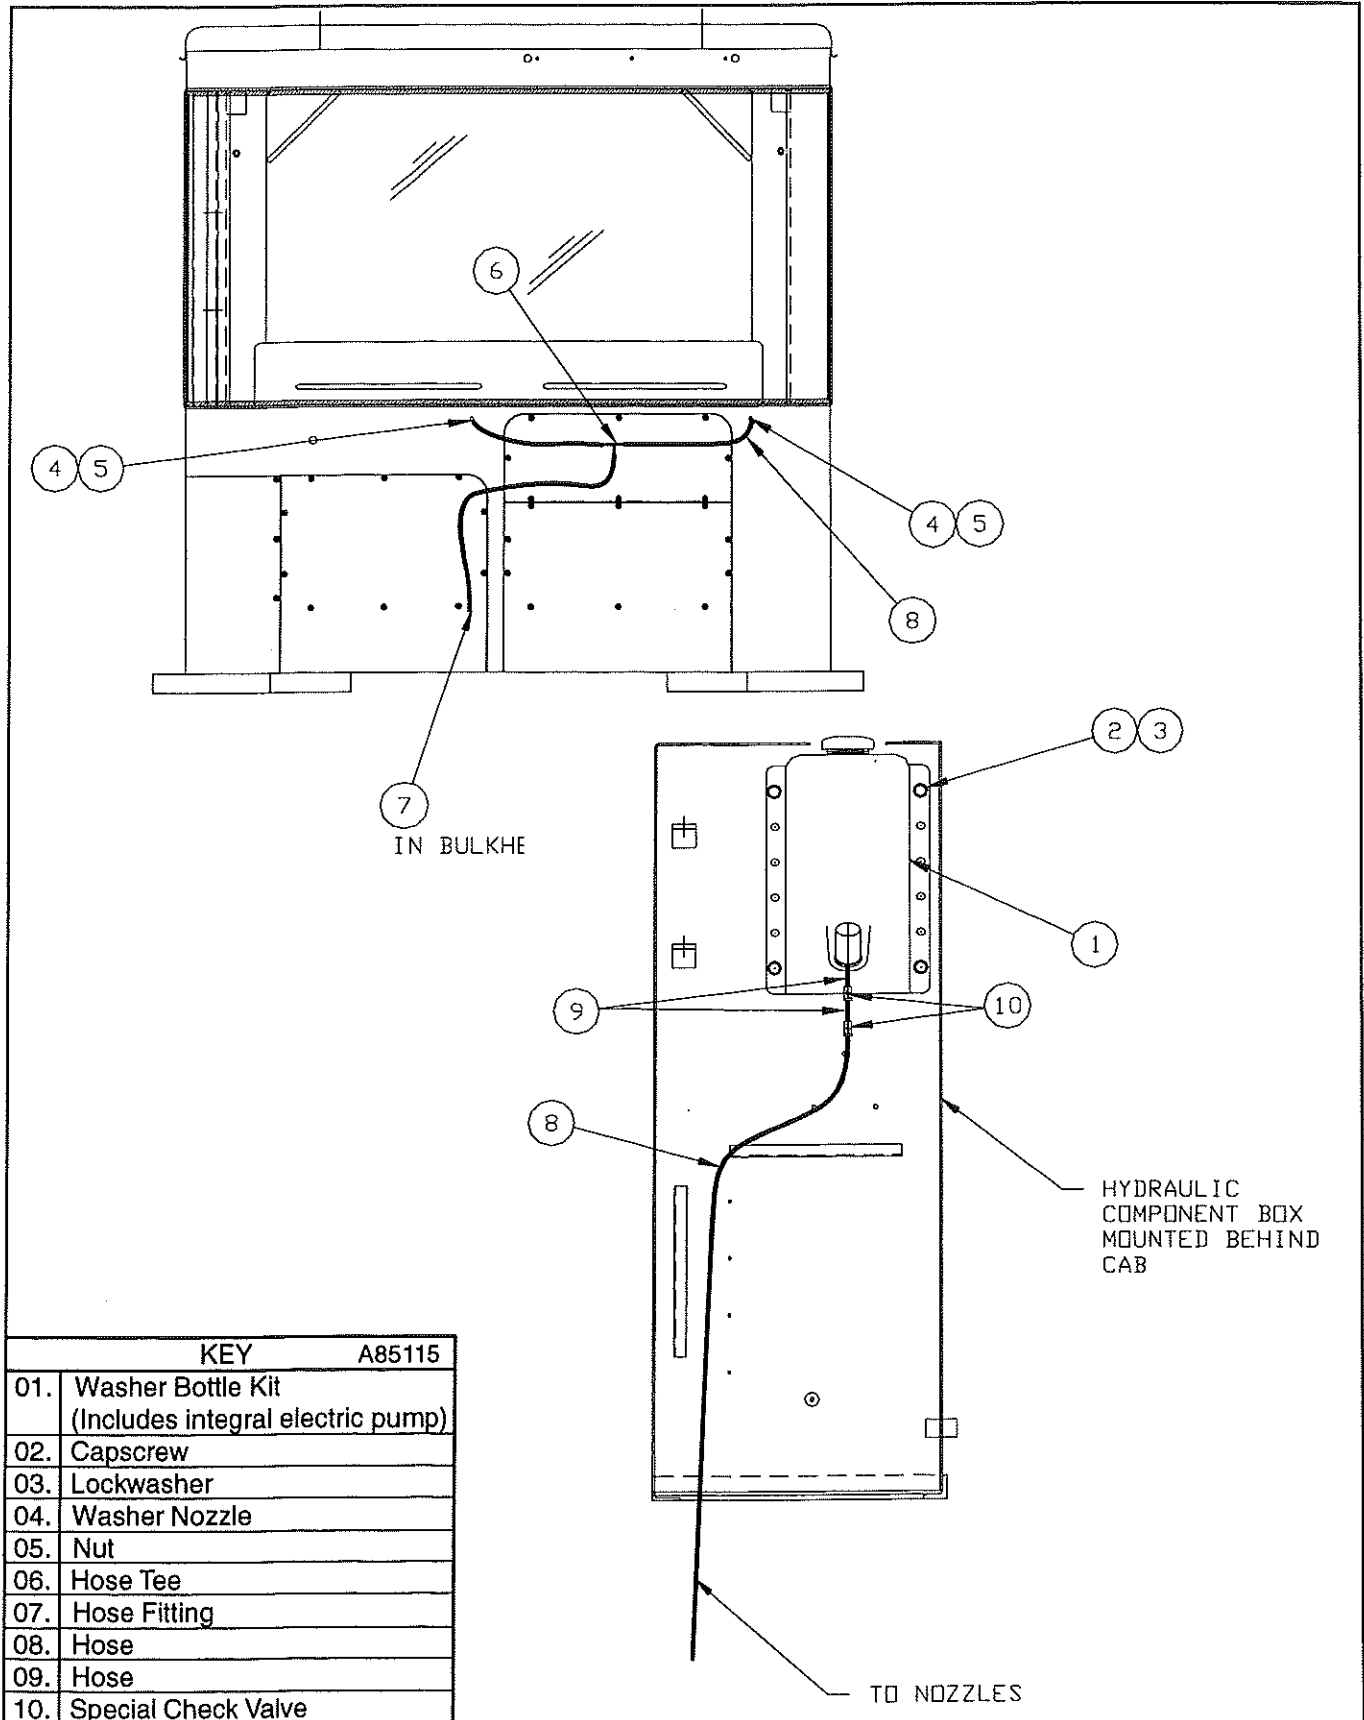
TYPICAL WINDSHIELD WASHER INSTALLATION (A85115)
